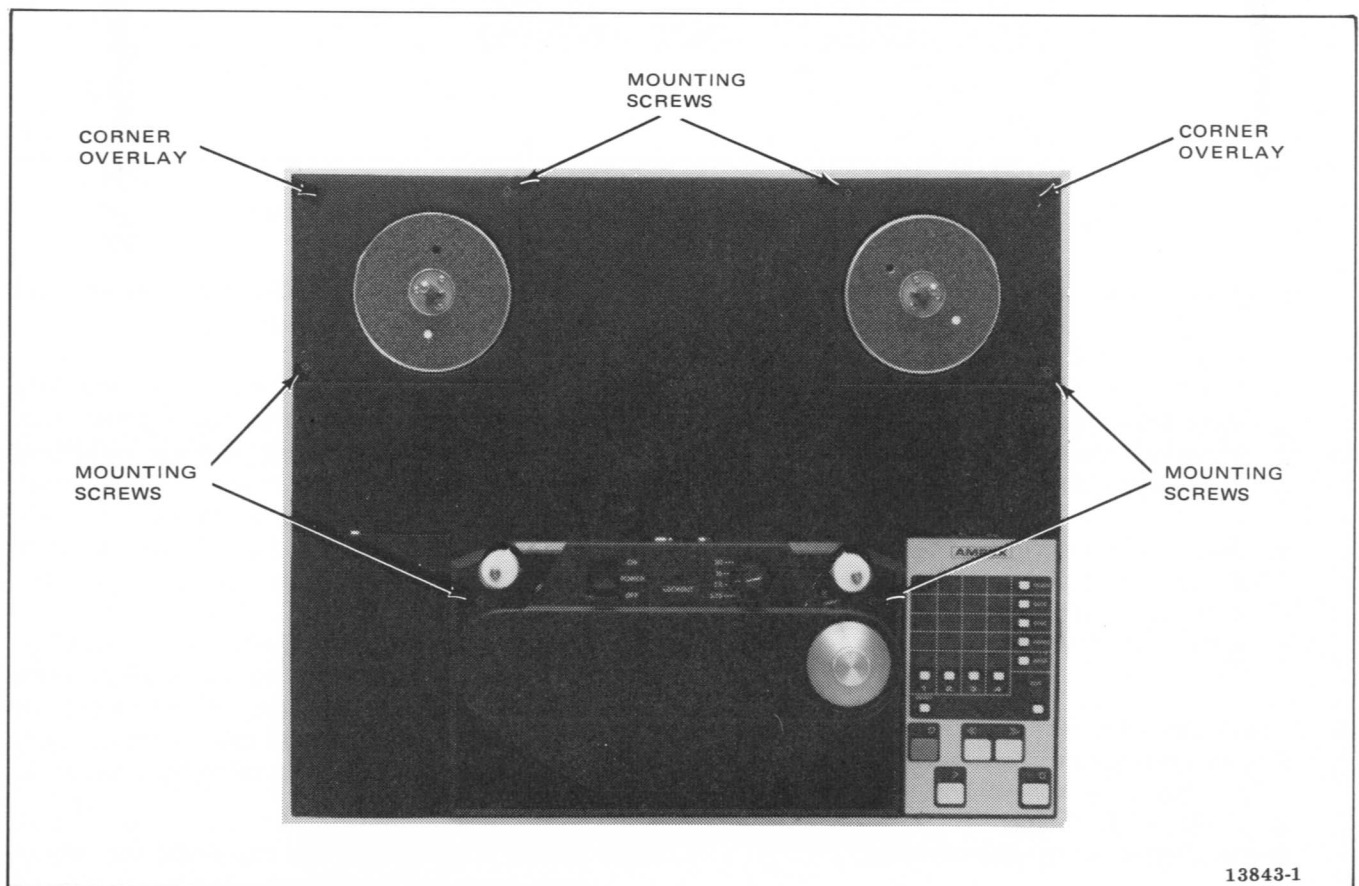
Rear Overlay Panel, Six Mounting Screws
